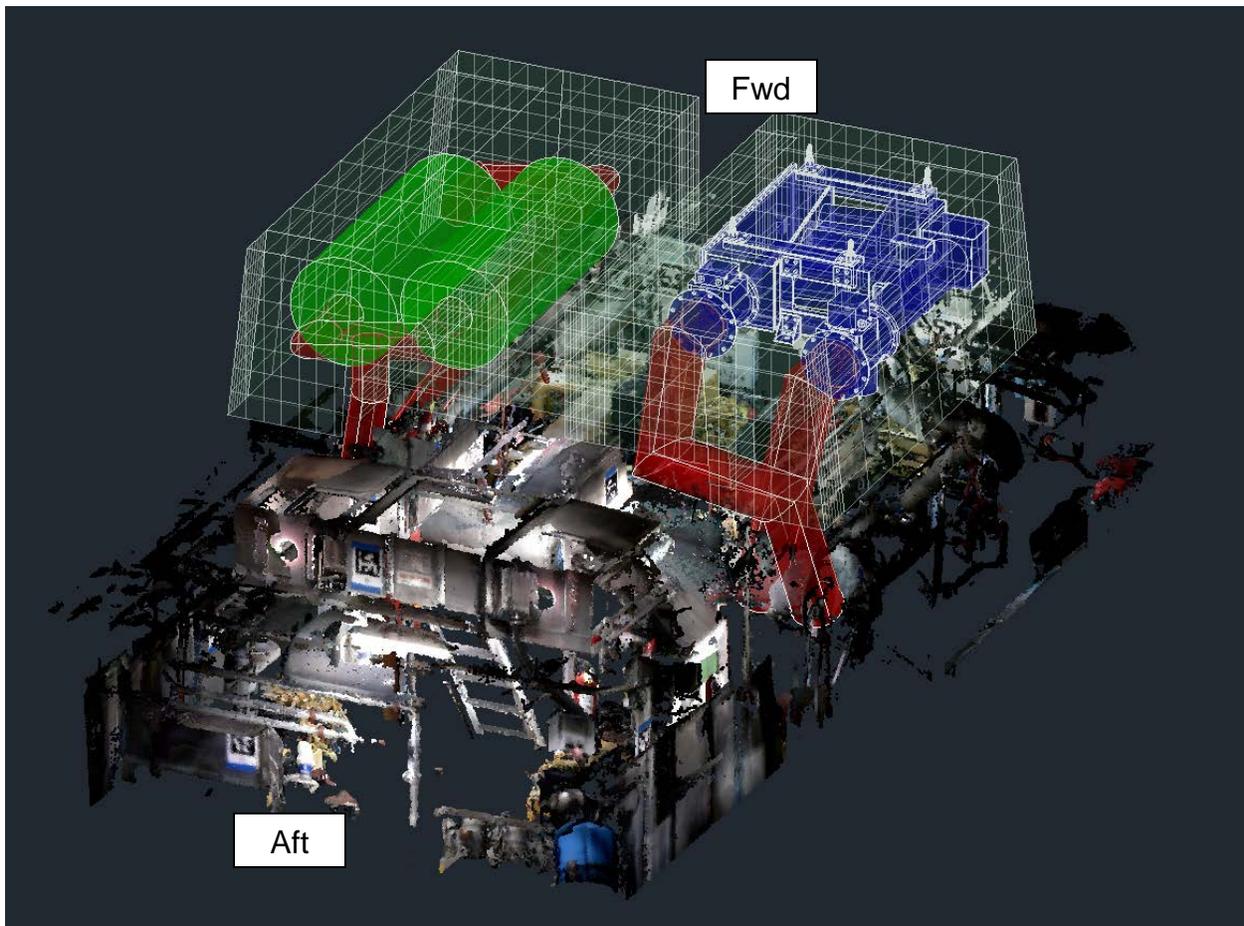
Pilot Boat Retrofit and Repower Arrangement
